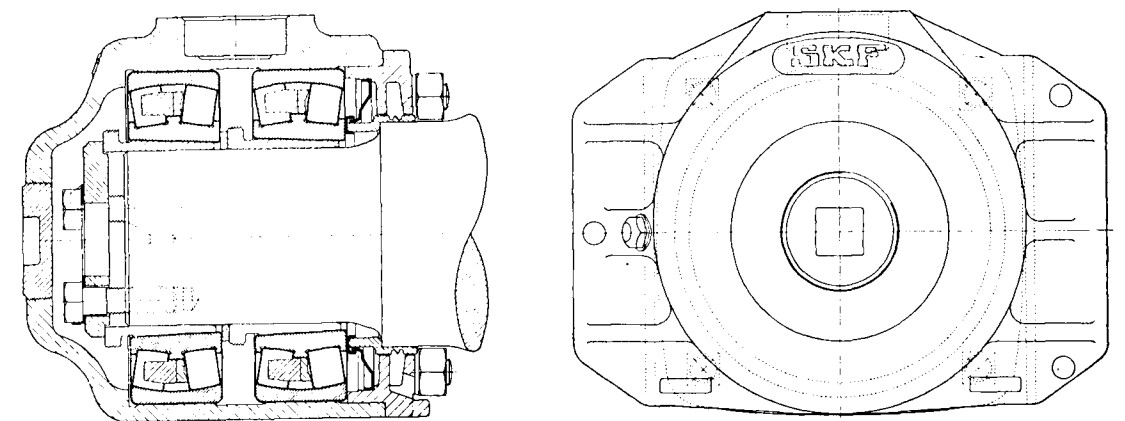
Spherical roller bearing axlebox for goods wagons. Solid box.
